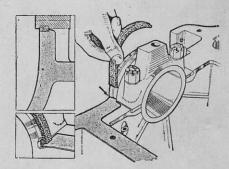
When fitting the cork seal for the rear main bearing it is important that the stepped end be in proper engagement with the sump gasket.
